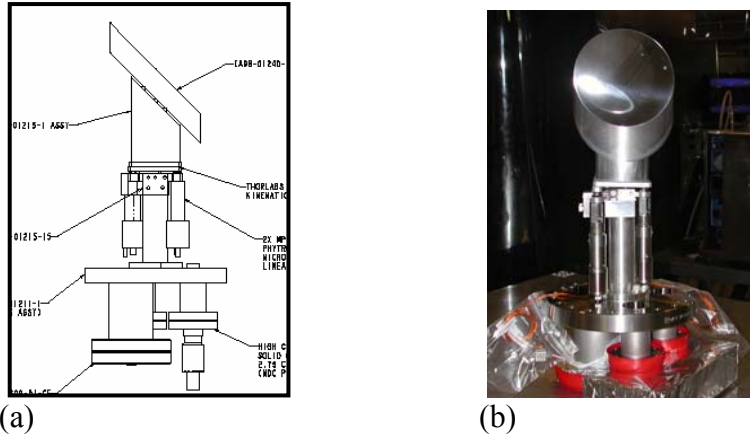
Technical drawing showing M1 in (a) and photograph of assembled M1 in (b).
